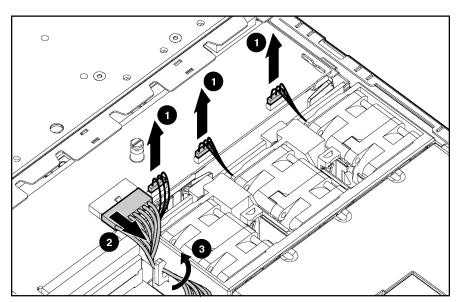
Disconnecting cables from the optical device/diskette drive interface board
